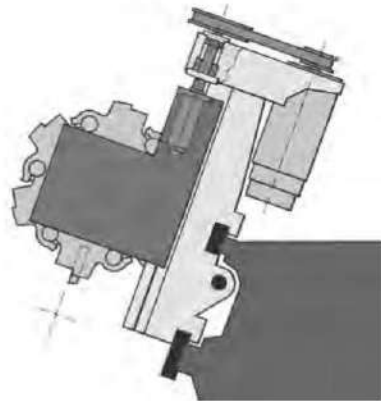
The drive for tooling in the turret of a CNC turnmill centre (Courtesy, George Fischer, Switzerland)
